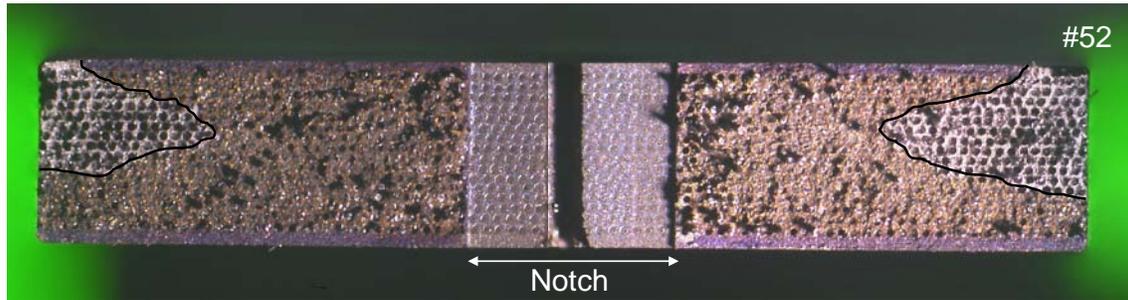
FCG Specimen Fracture Surface Exhibiting “Reverse Tunneling” with Crack Front Profile Highlighted
